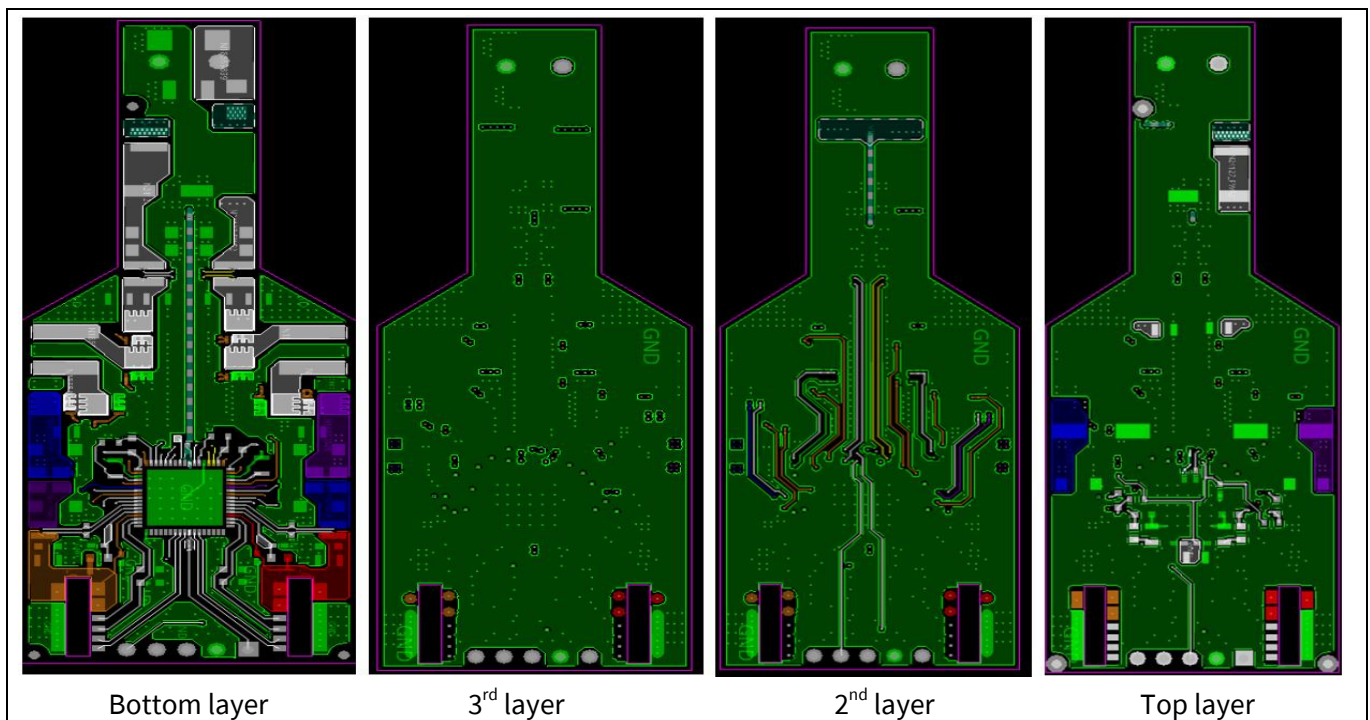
CLA solution demo (SD2230-1-R3) board – main board PCB layout
